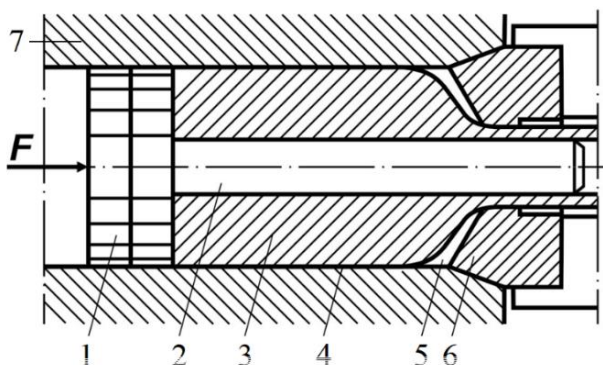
Diagram of the working unit of the installation with a horizontal hydraulic press: 1 – press washer; 2 – mandrel; 3 – sleeve; 4 – glass lubricant on the contact surface of the metal container; 5 – lubricating washer; 6 – die; 7 – container.
